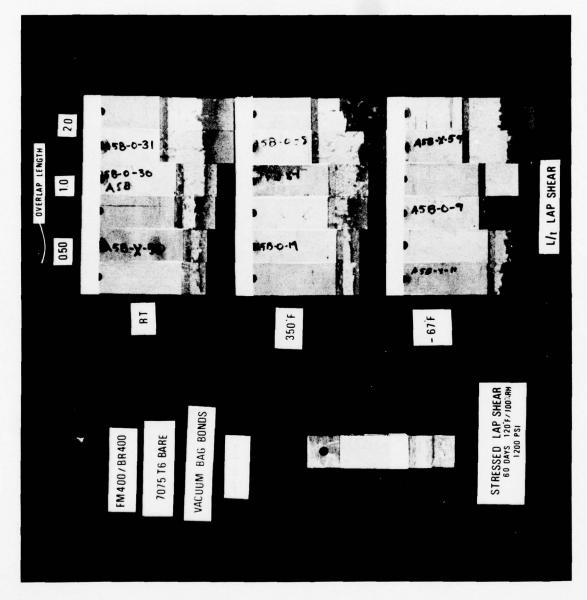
Specimen Failure Surfaces—FM 400, Optimized FPL Etch, Vacuum Bag Bonds
